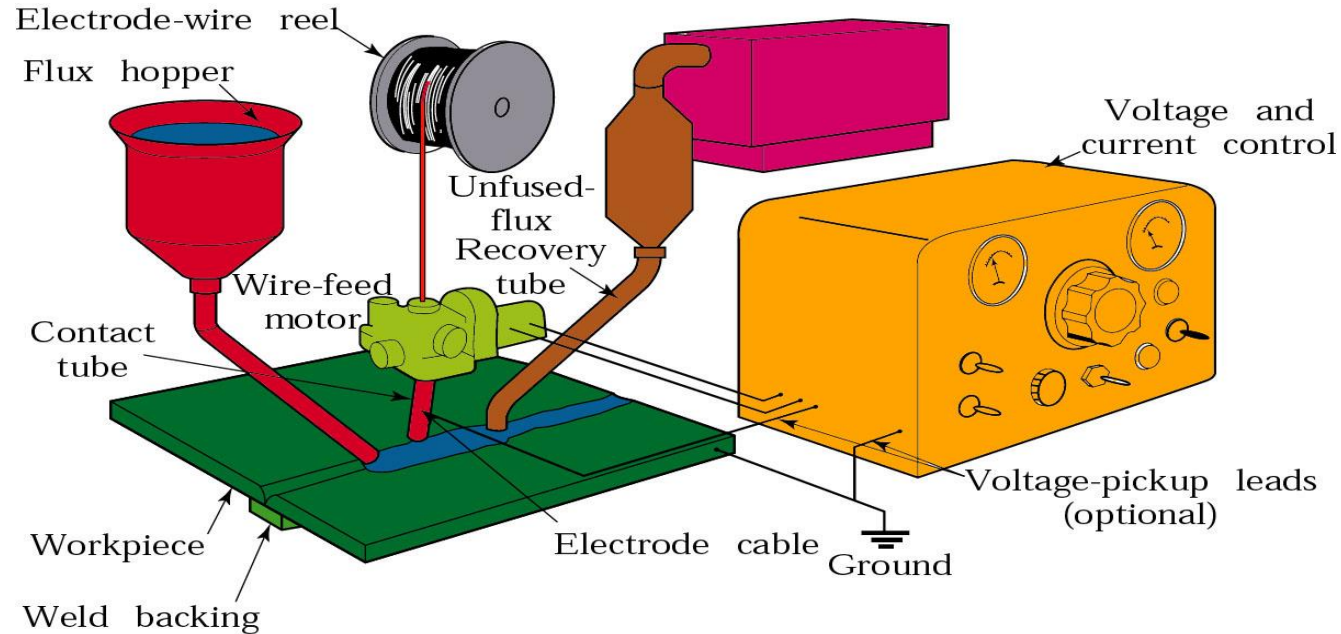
Schematic illustration of the submerged-arc welding process and equipment. The unfused flux is recovered and reused. *Source:* American Welding Society.
